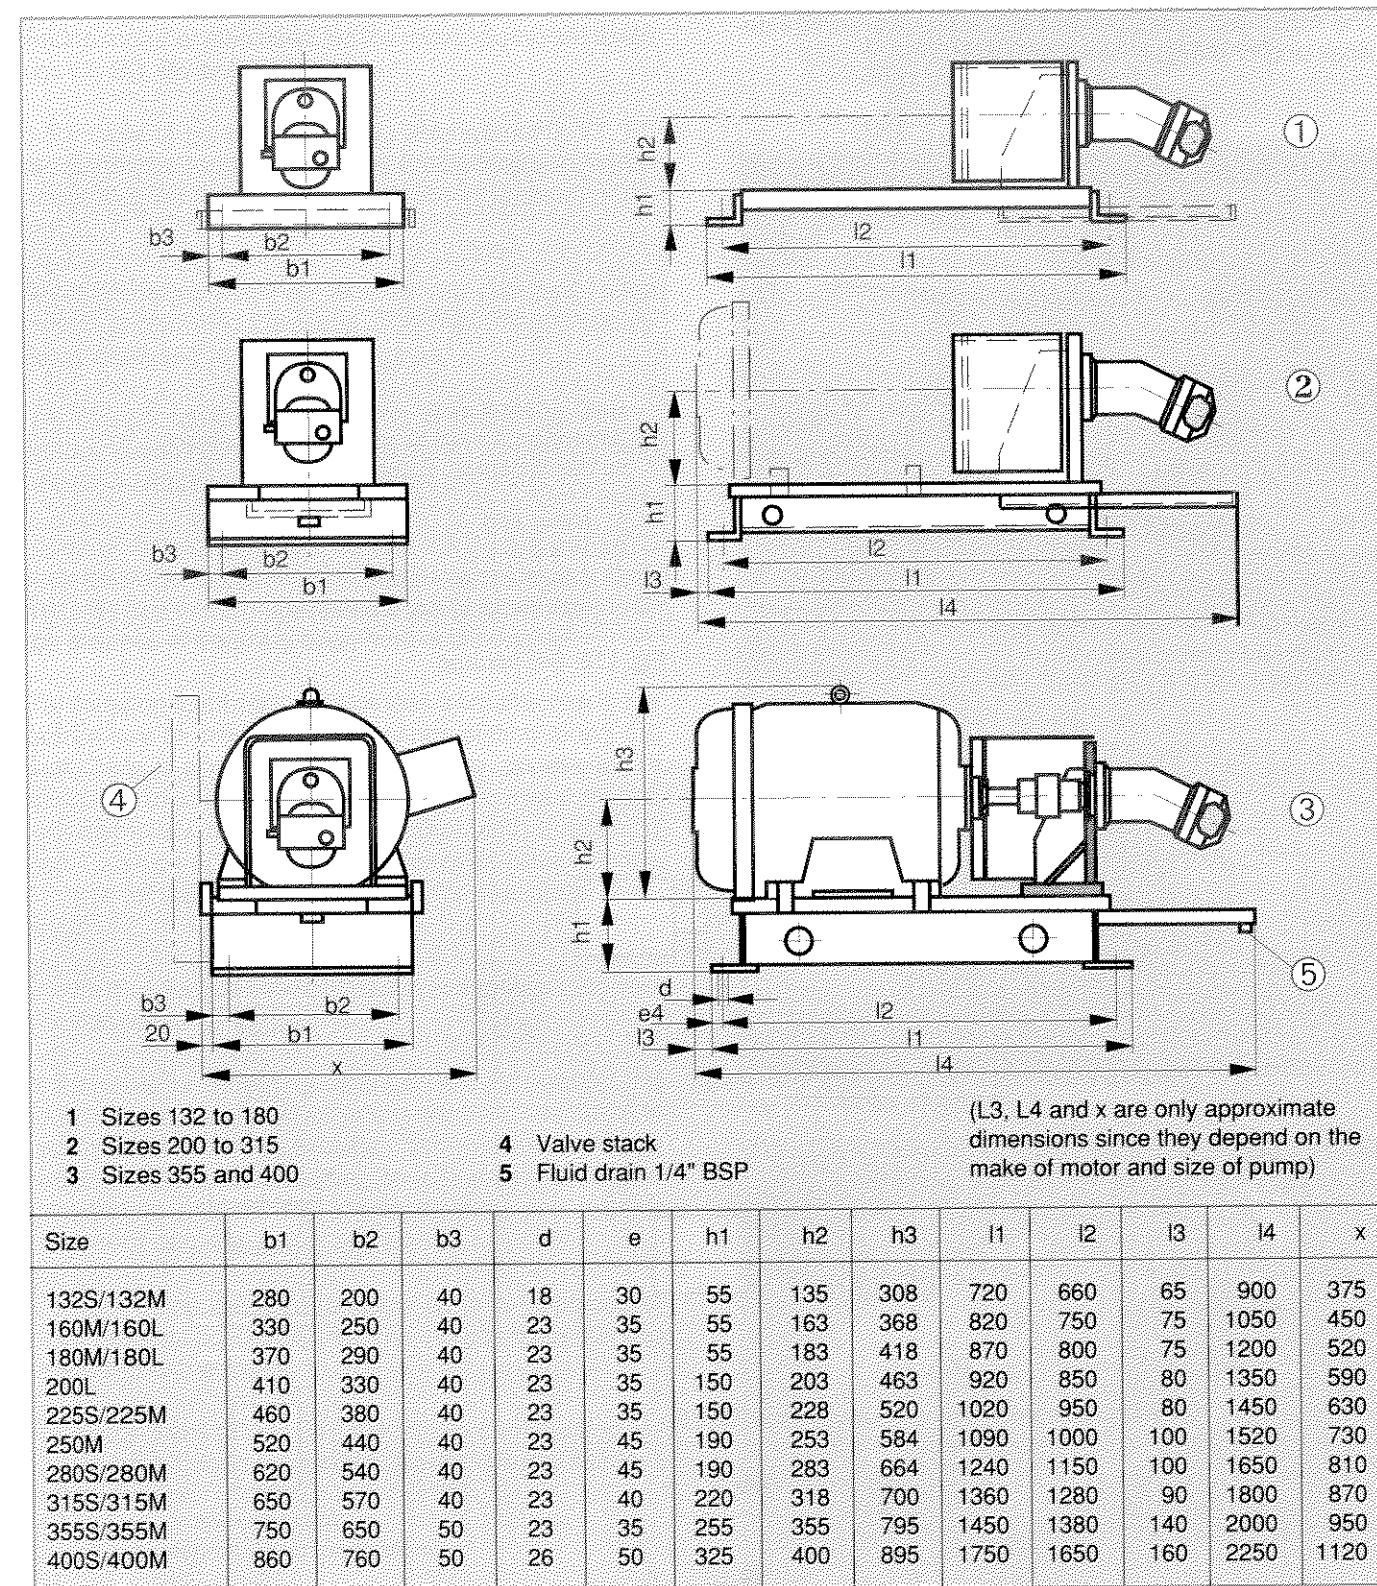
Principal dimensions of motor-pump sets with motor mounting arrangement type B3
